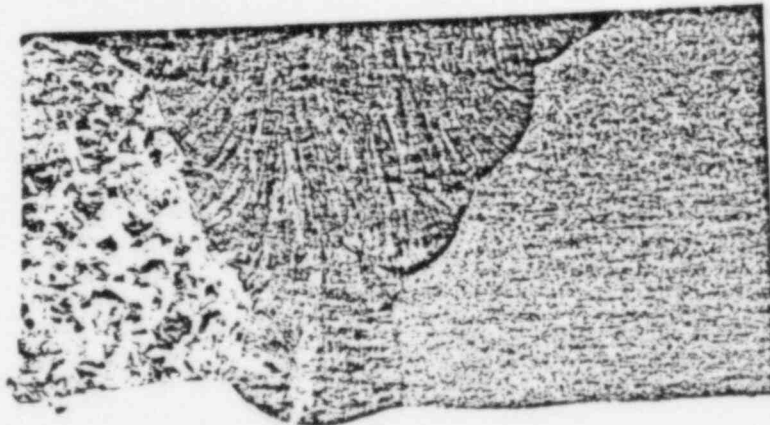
Cross Section of Weld C Associated with UT Indications
